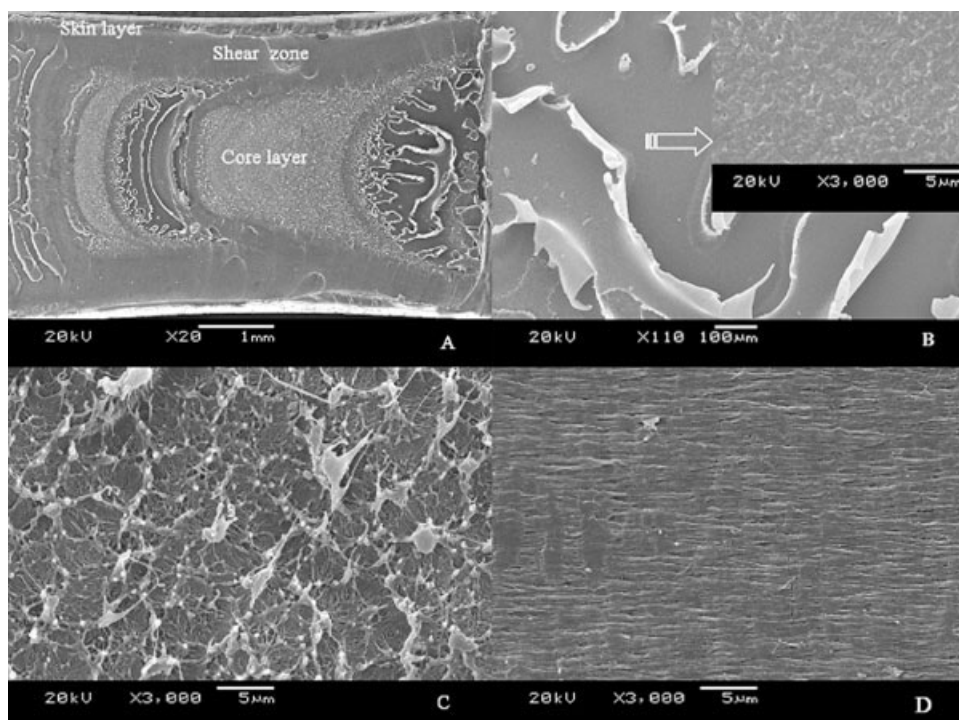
Scanning electron micrographs of fracture surface of 5300B(low molecular weight) at far-gate-end. (A) full view, (B) magnified view of tearing-brittle fracture surface in core layer, (C) magnified image of heat softening/melting fracture surface in core layer, (D) magnified image of shear zone.
